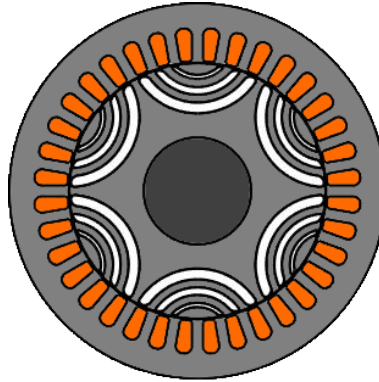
Cross-section of the SyR machine selected as a reference.
